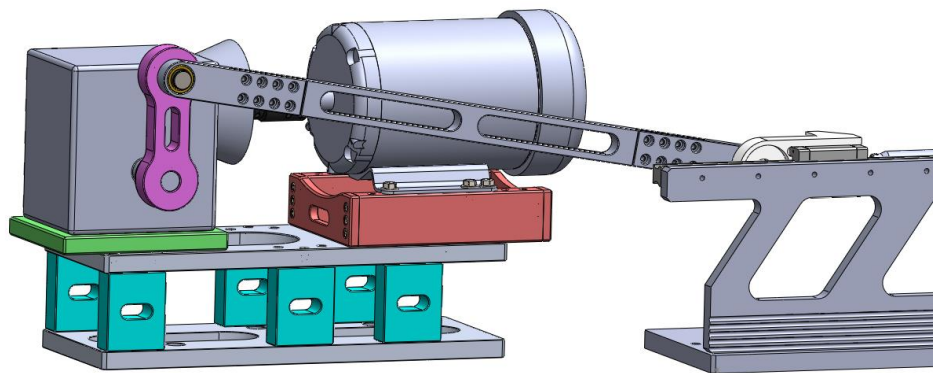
Large Gearbox Assembly – 5.5-inch Cam-arm Alignment
